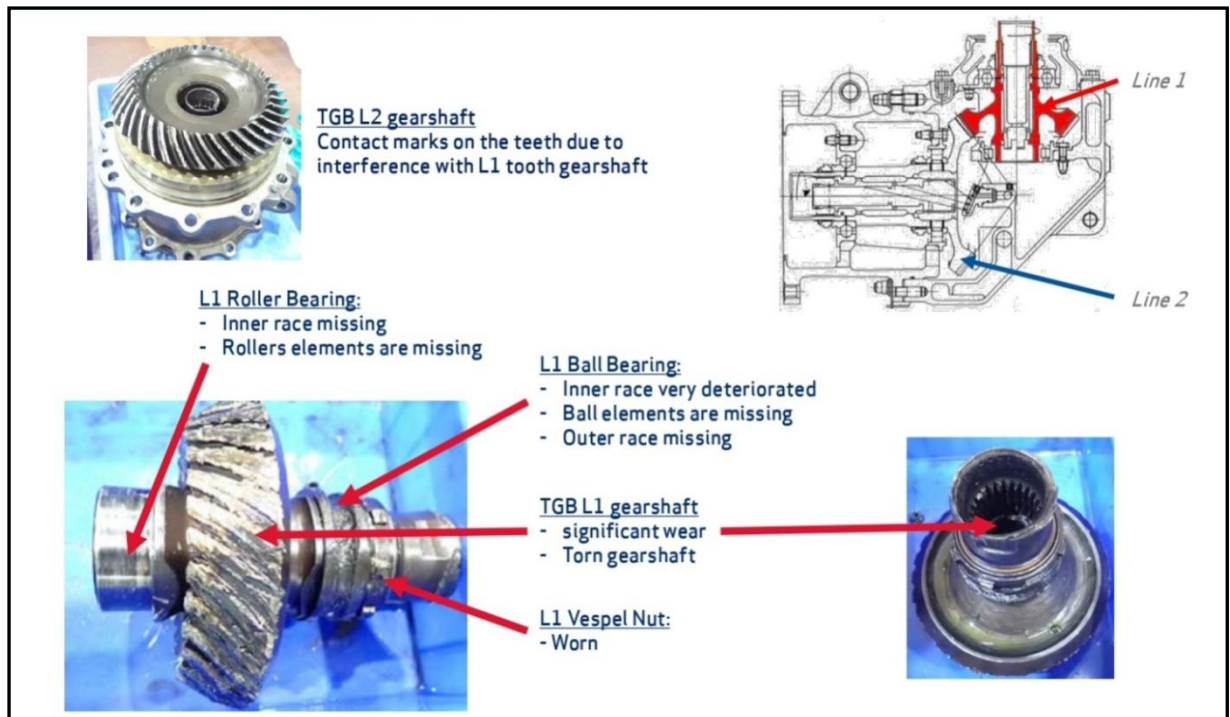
Inspection of TGB Gear shaft (Source: M/s CFM)
